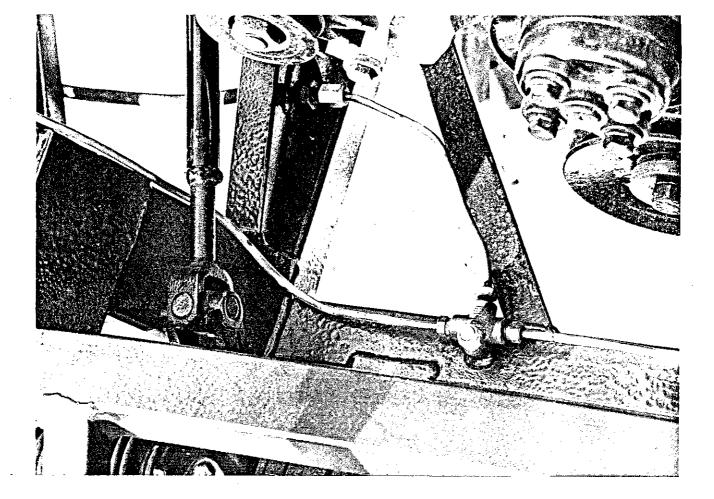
The lower steering column universal joint and the position of the three-way brake pipe union can be seen in this picture.
